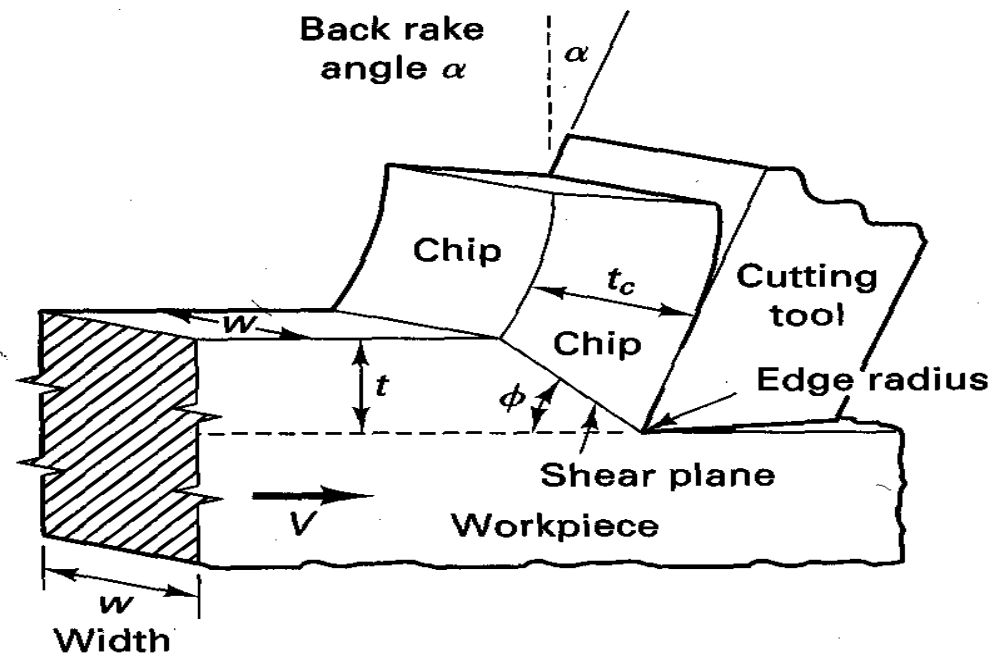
FIGURE Schematic of orthogonal machining. The cutting edge of the tool is perpendicular to the direction of motion (V). The back rake angle is α . The shear angle is ϕ .
